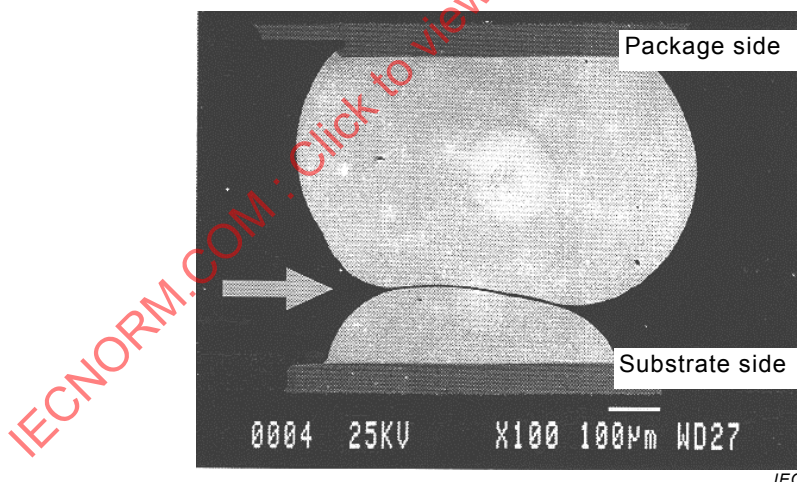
Repelled solder caused by contamination on the solder ball surface
